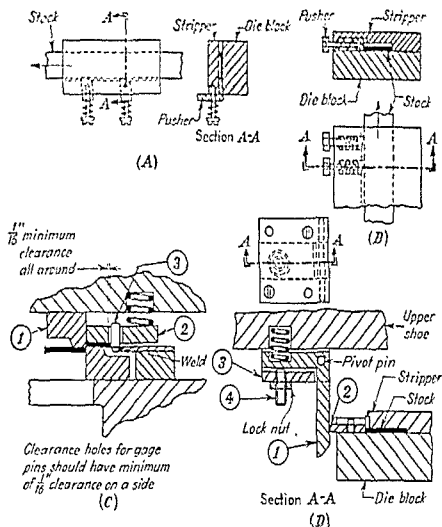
Stock guides: (A, B) pusher types;¹¹ (C) pin type¹² (Ford Motor Co.); (D) lever-actuated pusher type.¹³
